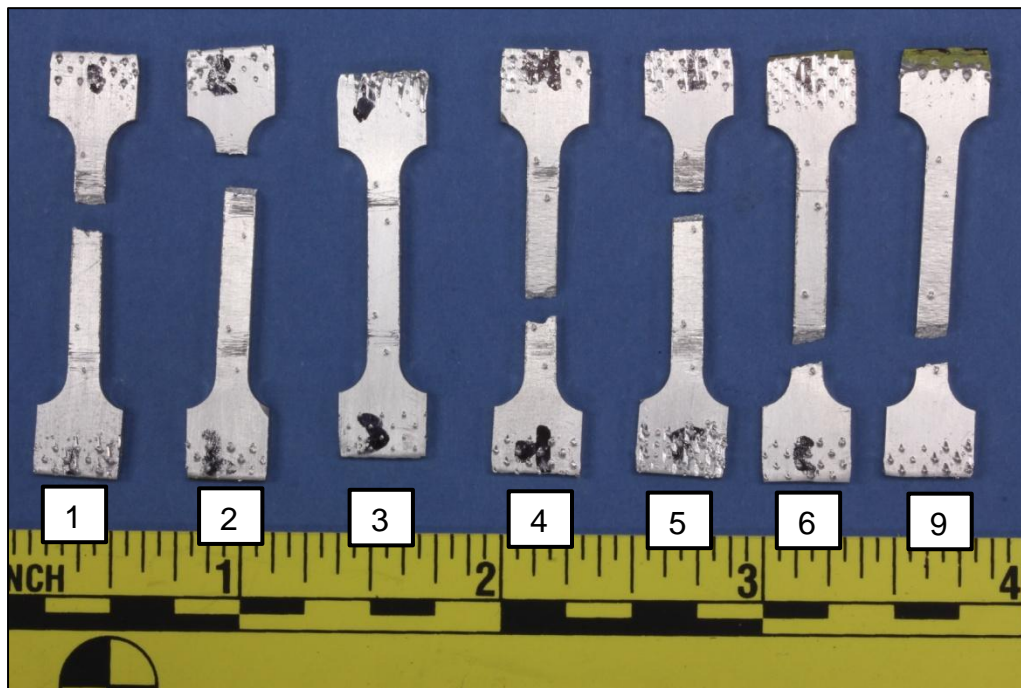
Overall view of the tensile specimens from the fenestron attachment ring after testing was completed.
